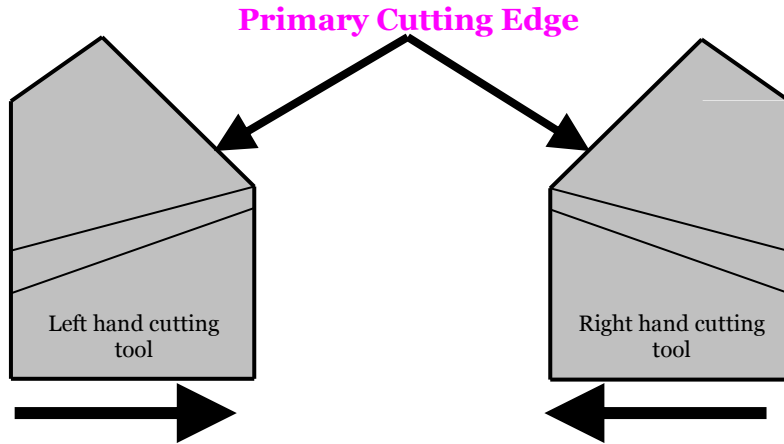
(a) Left hand (b) Right hand cutting tool
